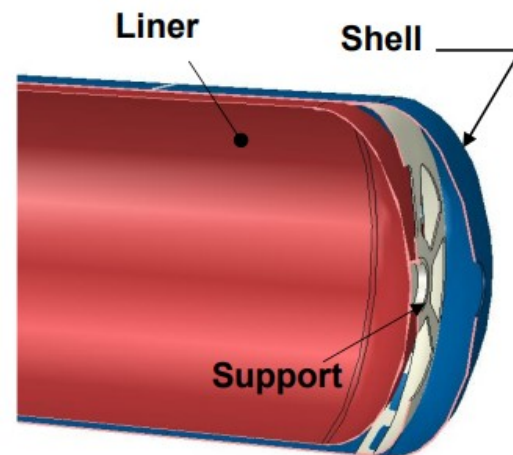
Boss-linked support structure used for long haul trucks, aluminum construction
